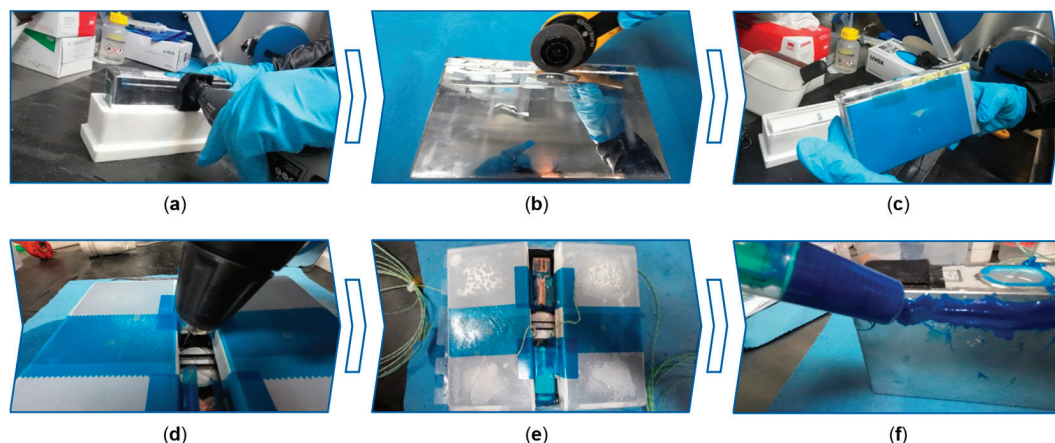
Systematic approach for integrating two thermocouples into a large-format prismatic cell; (a) milling a groove 5.0 mm below the housing cover; (b) cutting through the thin cut edge; (c) extraction of the jelly rolls and the housing lid from the housing can; (d) drilling two feed-throughs for the thermocouples; (e) integration and positioning of the thermocouples; (f) closing and sealing of the cell.
